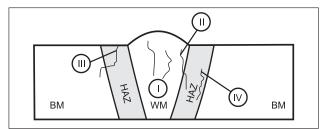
Classification of cracks in welded joints (BM - base material; HAZ - heat affected zone; WM – weld metal)
